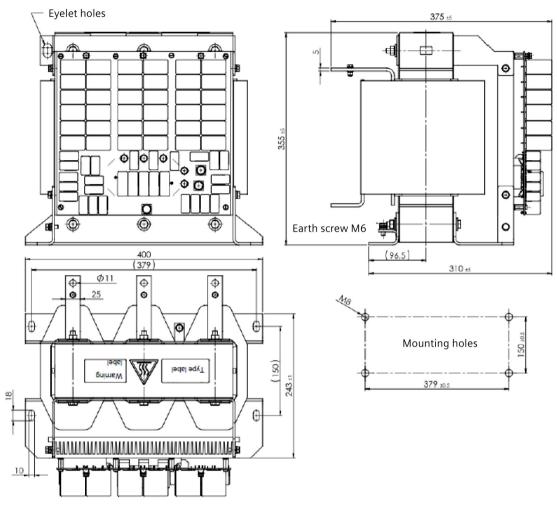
Dimensions for JTA:TEF1203-0LB
